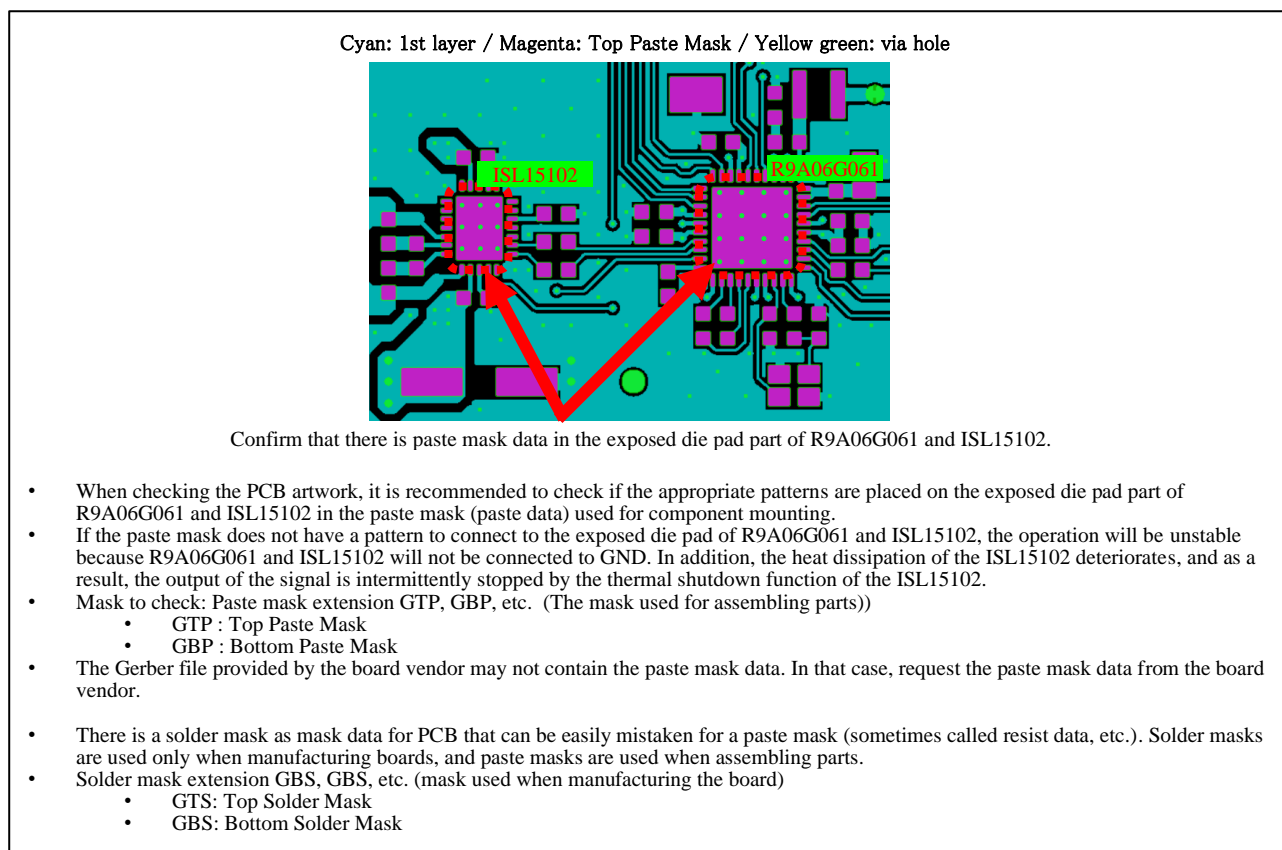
Example of checking the paste mask (paste data) used for component mounting
